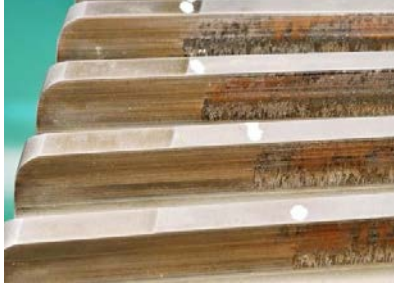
HSS gear set damage. Photo from GEARTECH, NREL 19599.
